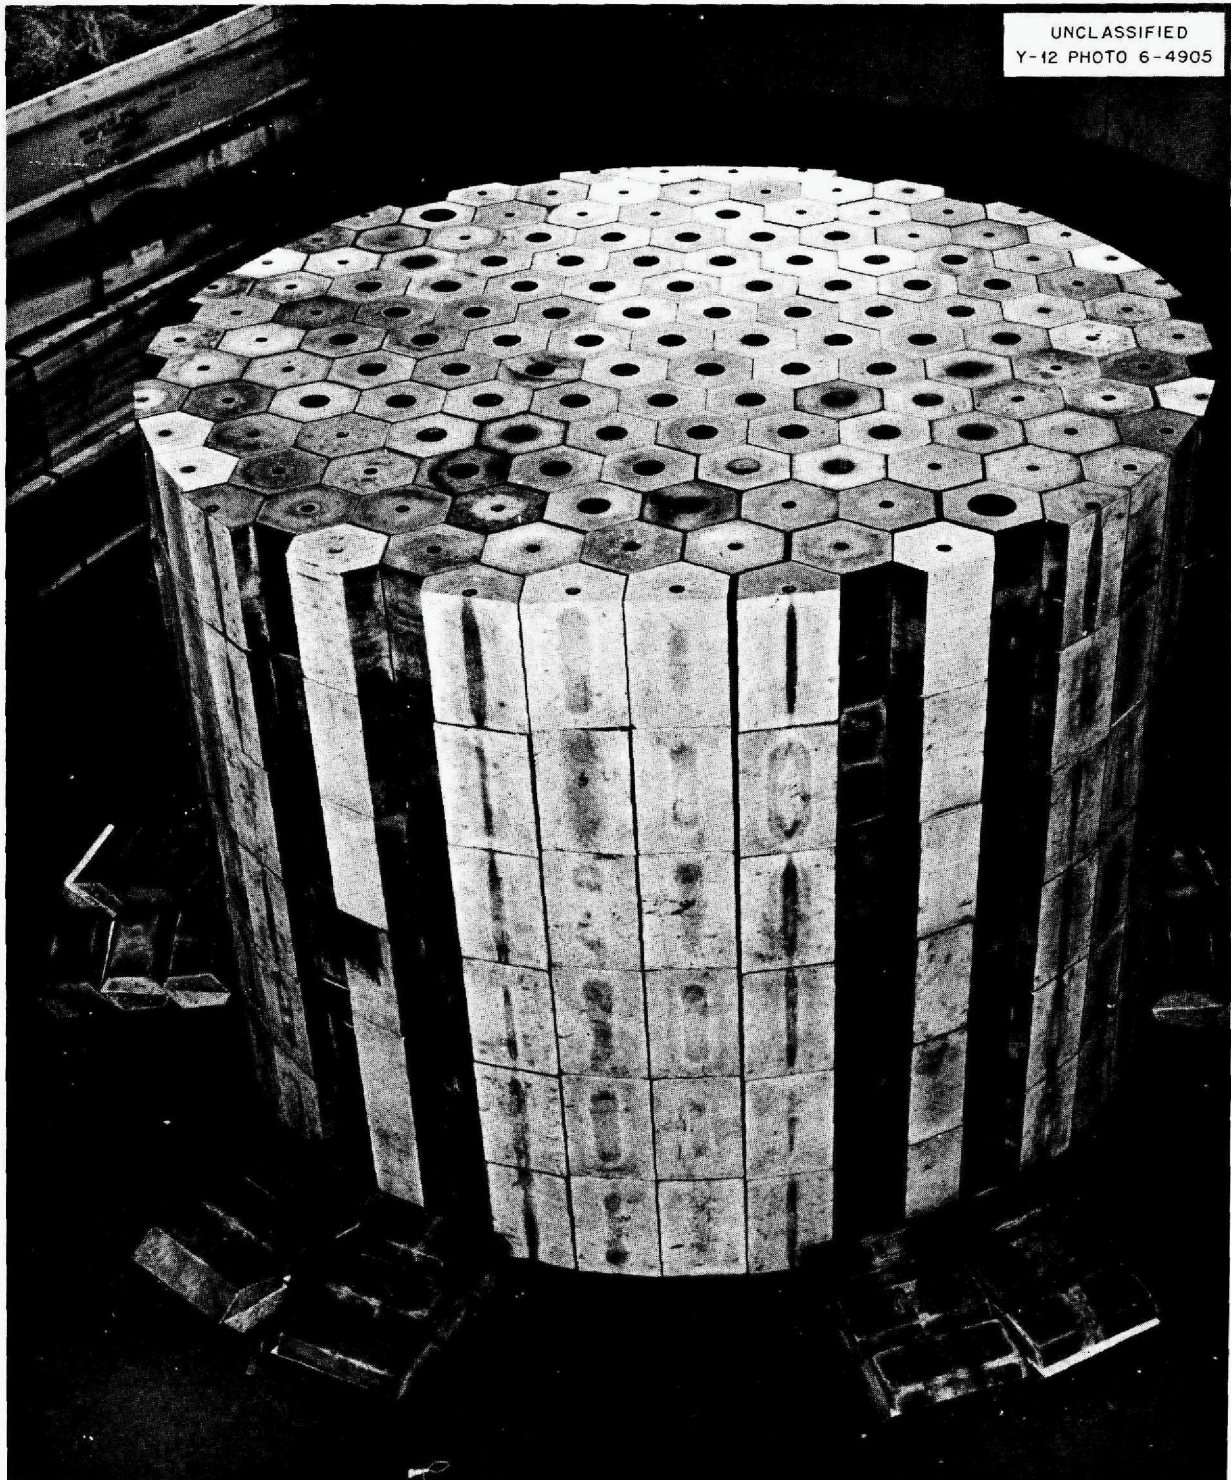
Beryllium Oxide Moderator Blocks Machined and Stacked.
